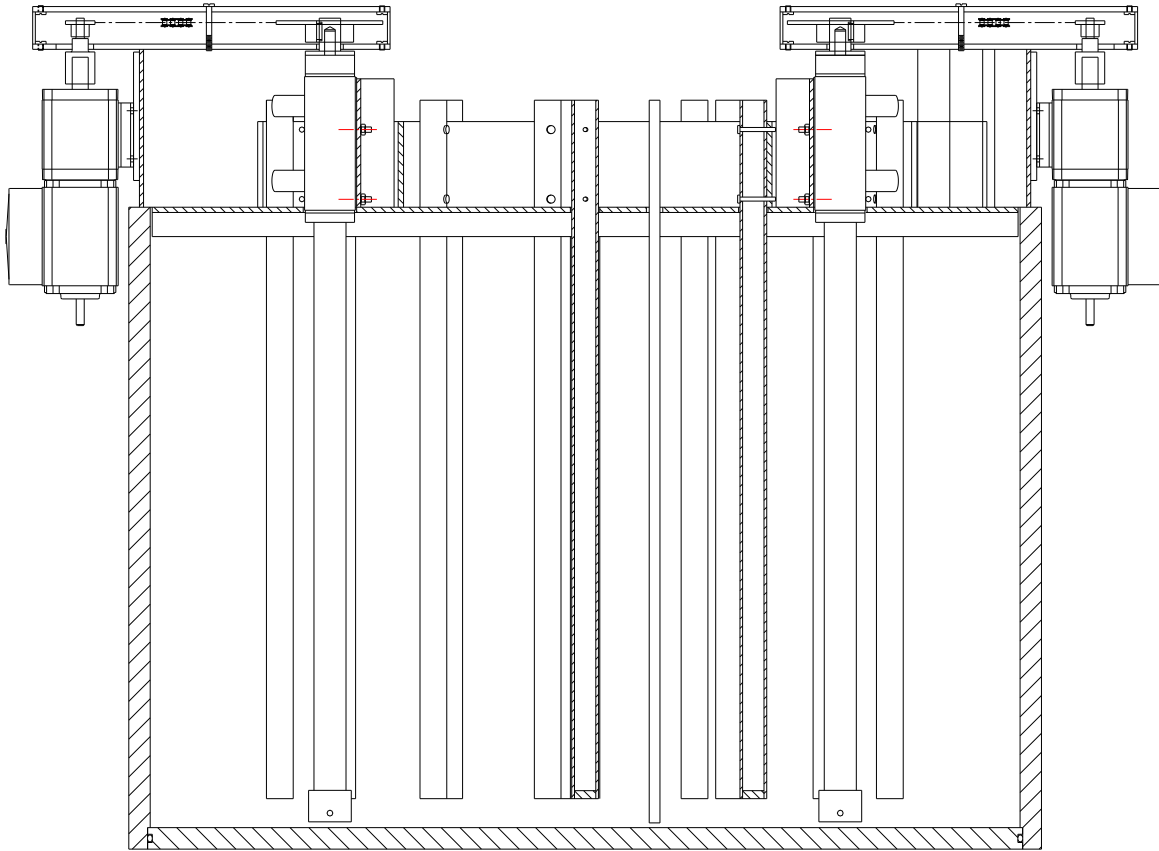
Side View of Obstructions MJP Assembly and Transfer Tubing
